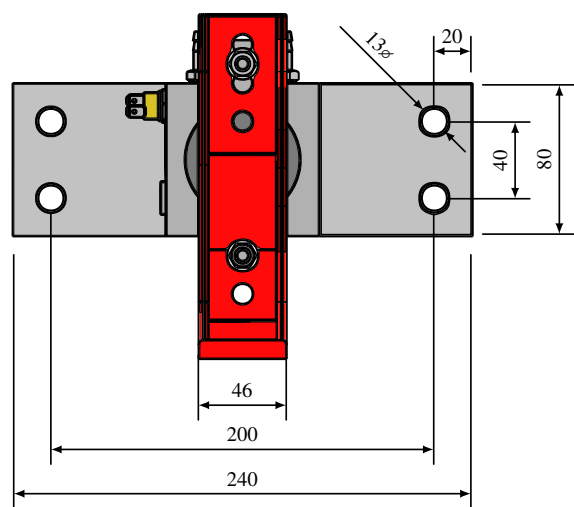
Drawing of Westcode T0360NB25A in mm (W40 package).
